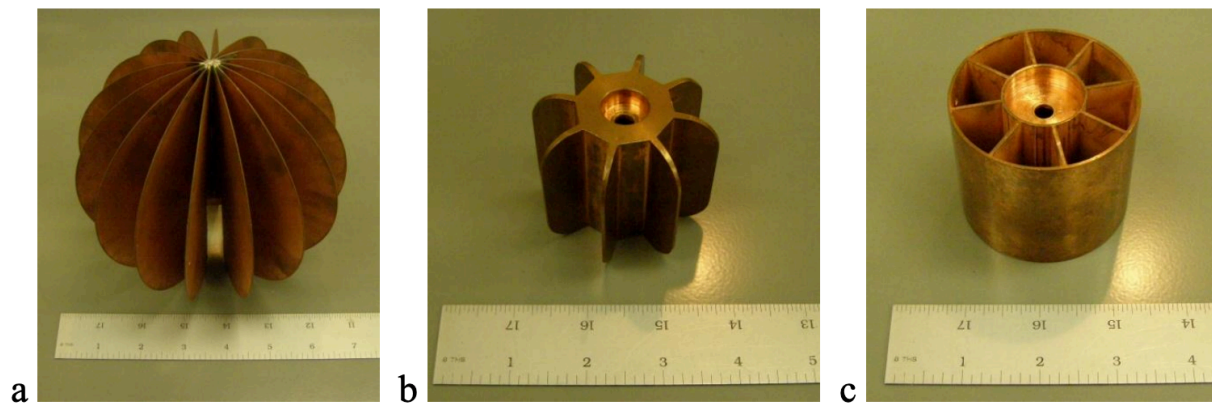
Cryocooler cold head configurations for testing: (a) orange slicer, (b) starburst, and (c) Ferris wheel
